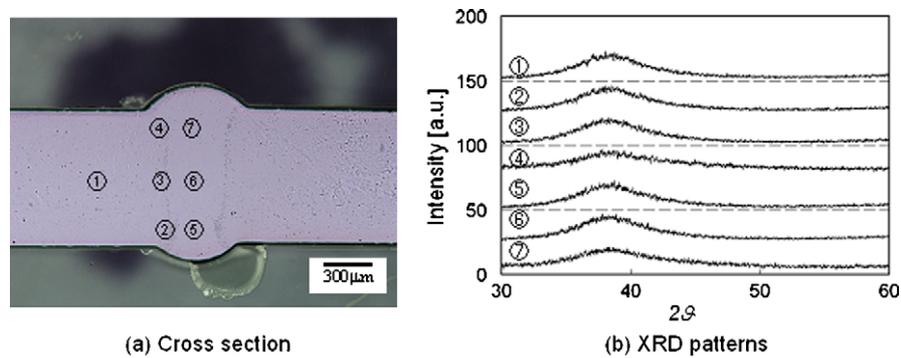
Cross sections and XRD results of weld bead produced at 72 m/min welding speed.
